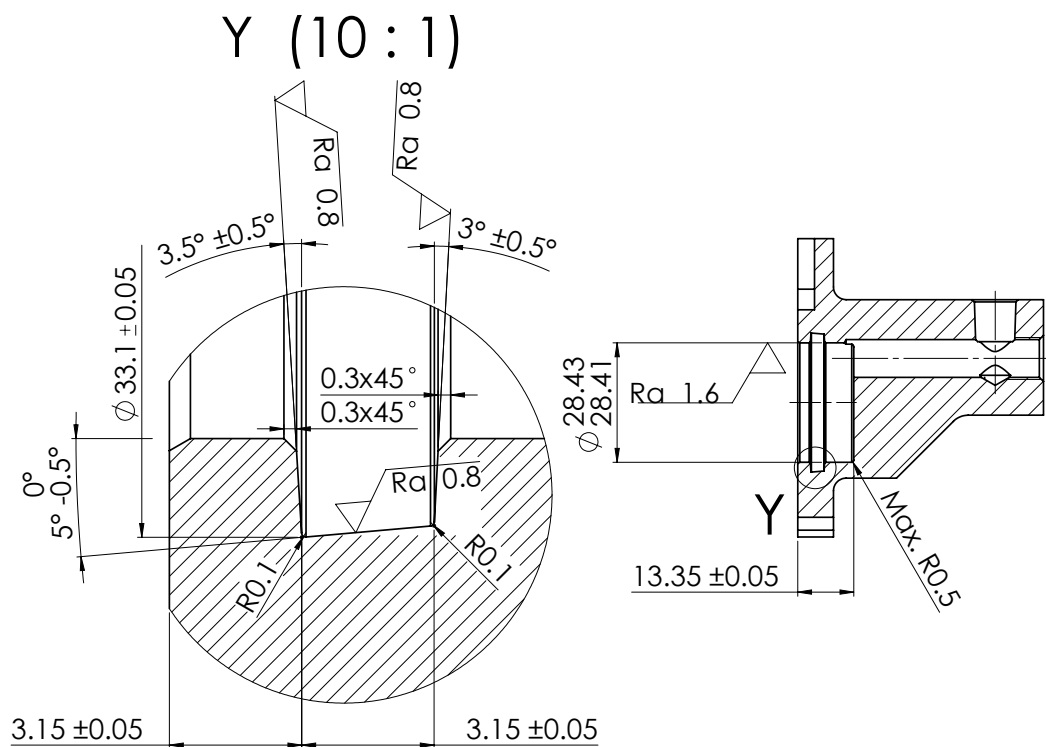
Drawing of the piston seal groove that was used to order the particular machining tool.
